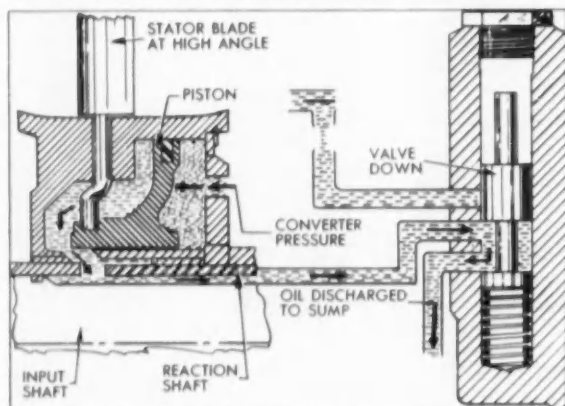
When control valve is depressed oil is discharged to sump and stator piston pushes against the vane crank and changes the blade to a high angle.
